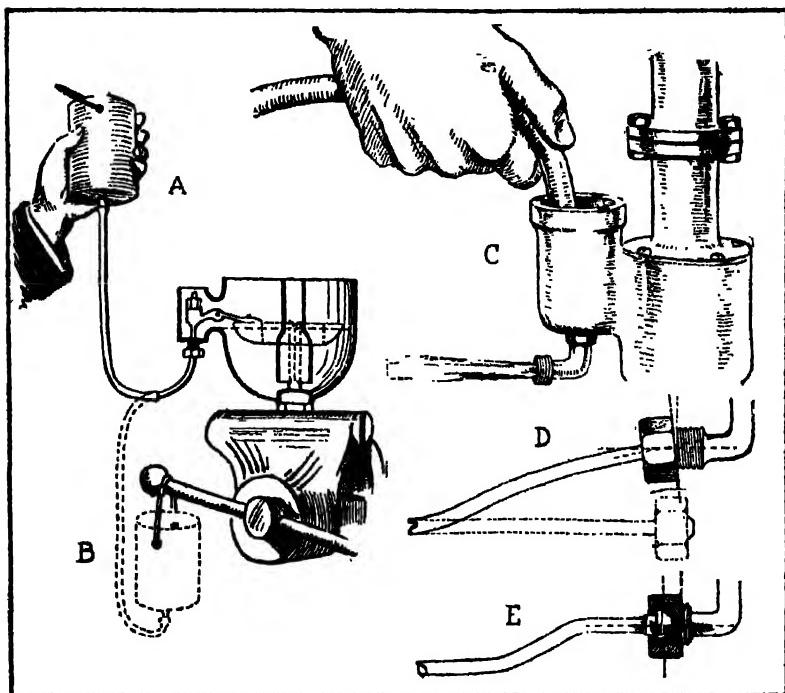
Outlining Method of Testing Carburetor Float Level, Clearing Out Clogged Fuel Inlet and Showing Proper Way of Connecting Gasoline Pipes.
